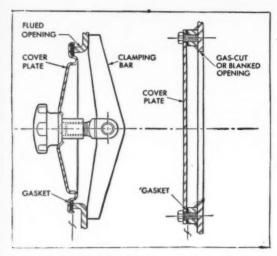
Formed seat cover designed to be fastened by an inner clamp at left. Assembly, welding and consequent warpage, and the cost of drilled and tapped holes are eliminated at right.
